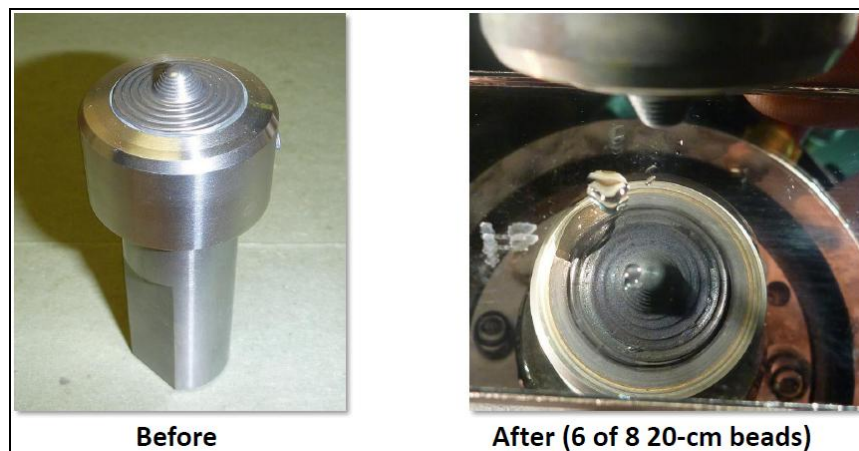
PCBN tool before and after FSP beads on 4142 steel plate.
